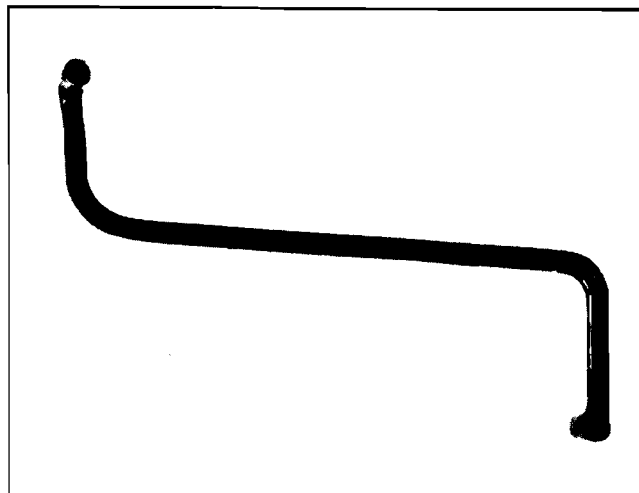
Front Door Hinge Tool J-22810 - "A, B & C" Styles
